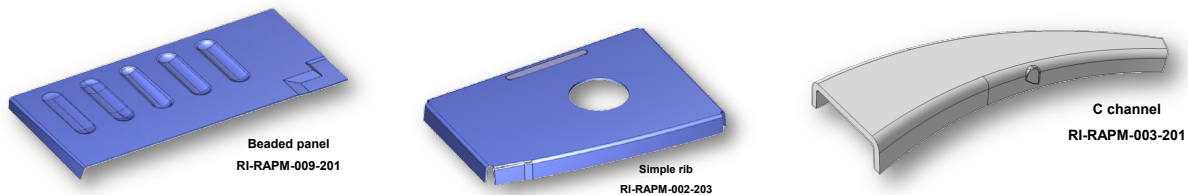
Pathfinder parts used in RAPM. Left, beaded panel; center, rib; right, C-channel.
